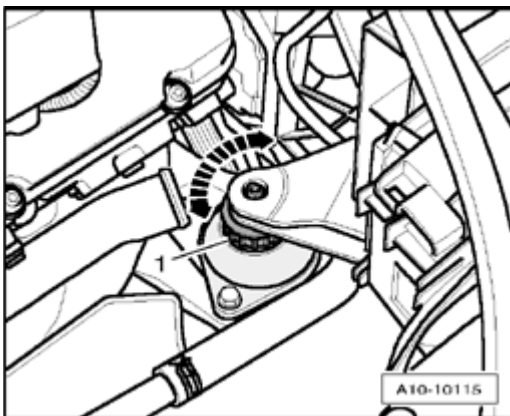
Turning Adjustment Ring On Torque Support Valve N382 Clockwise Until Stop
